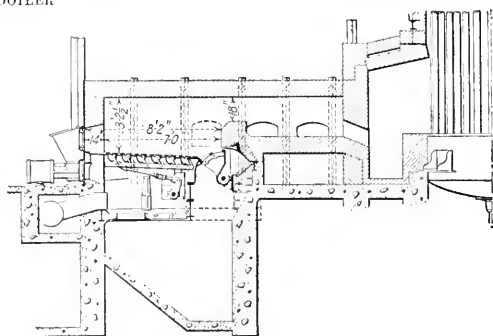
JONES SELF-CLEANING UNDERFEED STOKER IN FORGING FURNACE AND WICKES WASTE-HEAT BOILER
